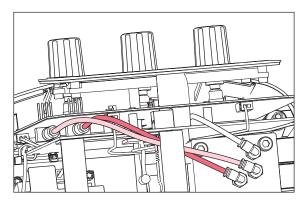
Tube connections between the Femtojet PCB and the valve block
